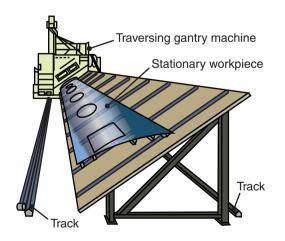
Schematic illustration of a peen-forming machine to shape a large sheet-metal part, such as an aircraft-skin panel. Note that the sheet is stationary and the peening head travels along its length. *Source:* Metal Improvement Company.
